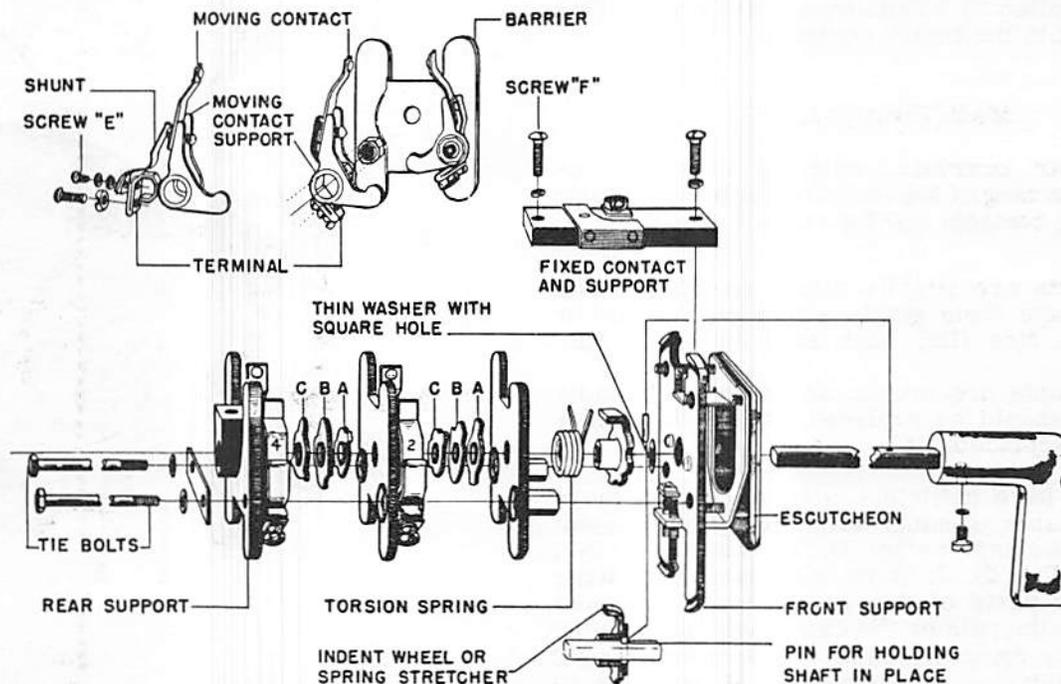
(8009283) Exploded View Of Type SB-1 Switch
